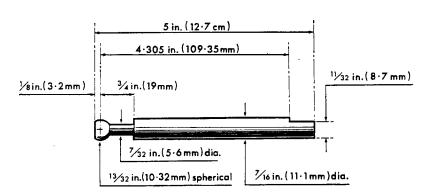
DETAILS OF GAUGE FOR SETTING TOP LINK AND RAMSHAFT BRACKET
